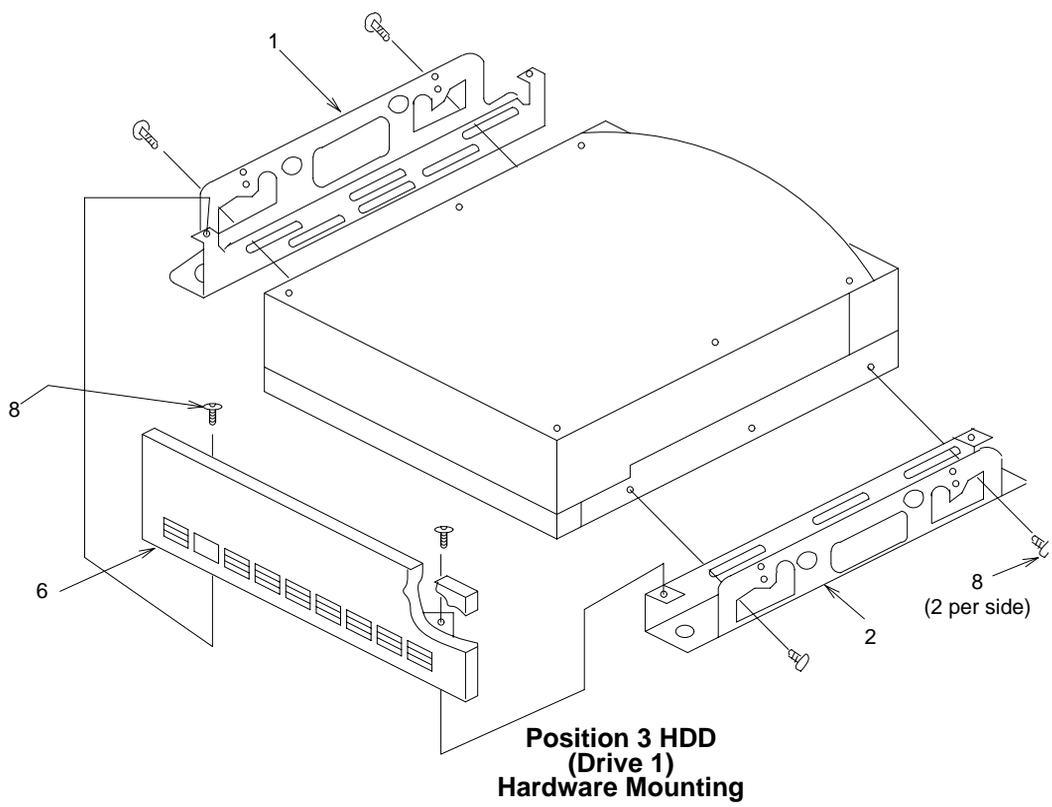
Position 3 Hard Disk Drive Mounting Kit
